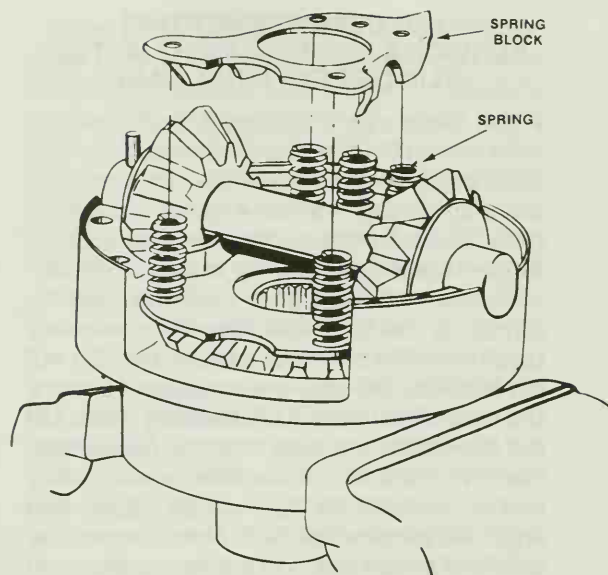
Installing the spring block. (Pontiac Motor Division of General Motors Corporation)
